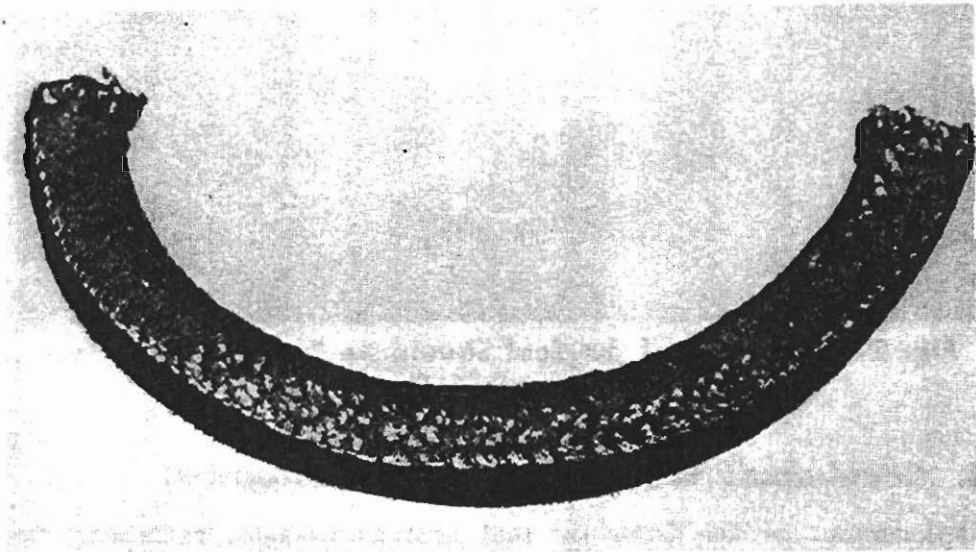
After the Seal Is Formed as Shown, It May Be Fed into Its Groove in the Cylinder Block.
